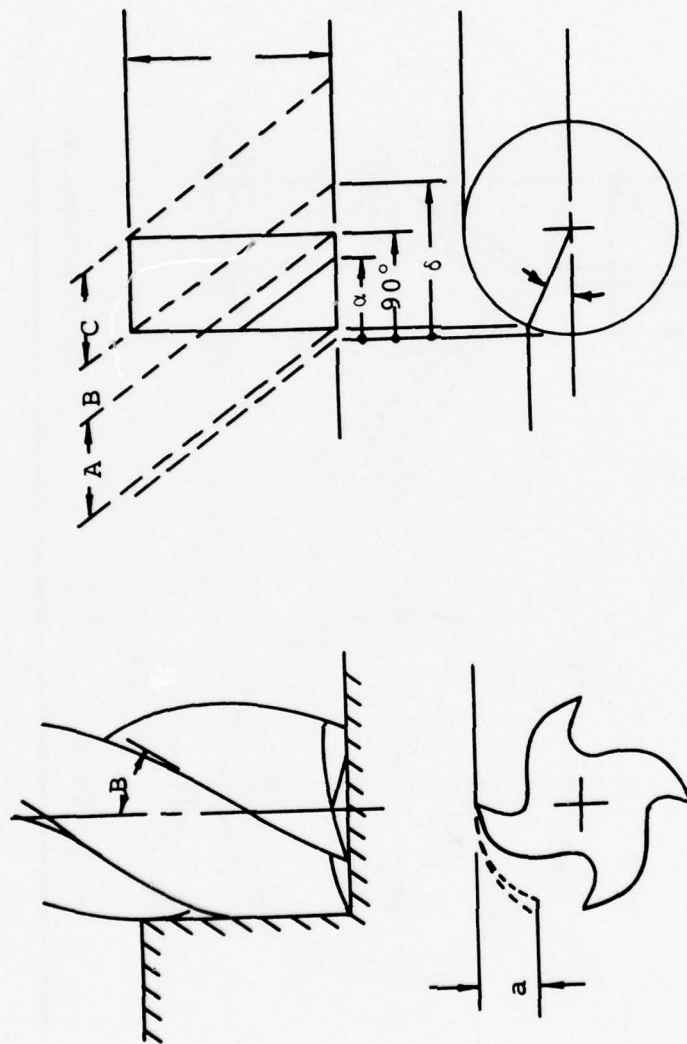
SKETCH OF UNROLLED SURFACE OF CUT FOR A TYPE II CLIMB MILLING CUT
